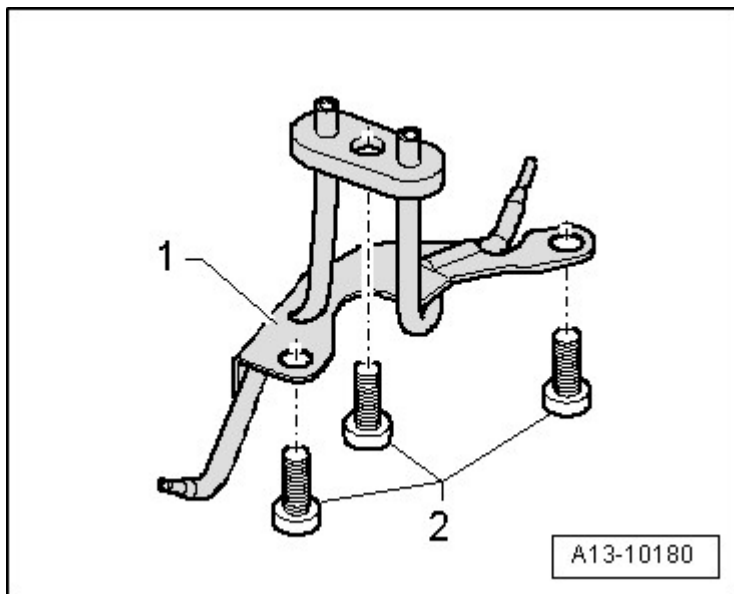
Identifying Oil Spray Jet For Piston Cooling
